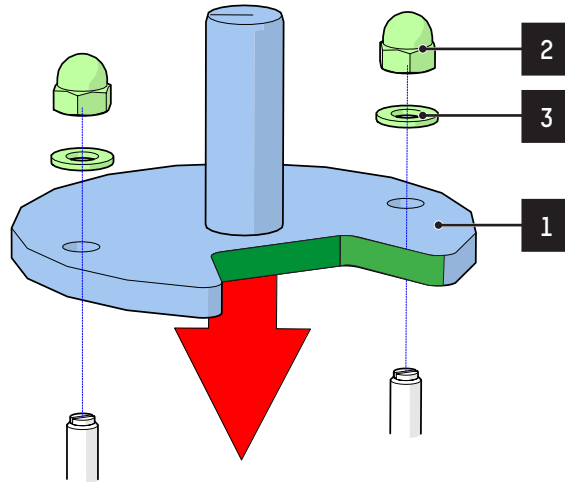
Fitting the lower axle of the TRS moving barrier
